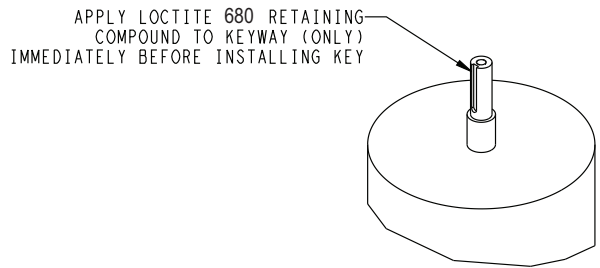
Aeroacoustic Fan (Black Bolt) Fan Motor Keyway
